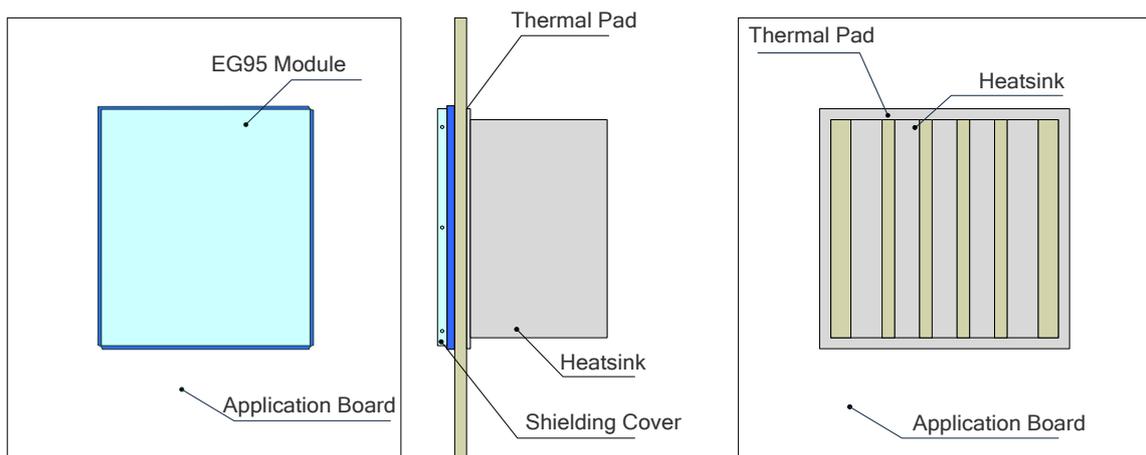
Referenced Heatsink Design (Heatsink at the Backside of Customers' PCB)
